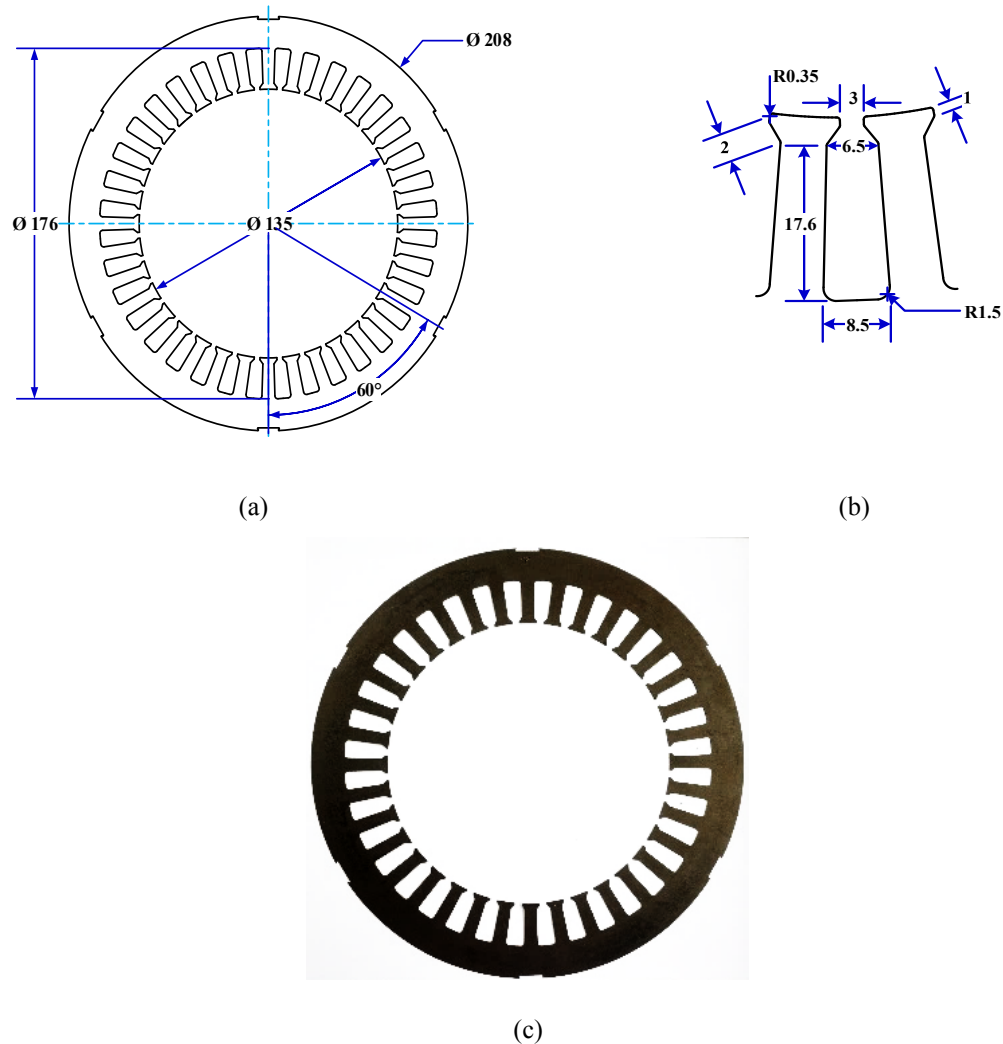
(a) Stator dimensions in mm. (b) Stator slot and teeth dimensions in mm. (c) Prototype stator lamination.
